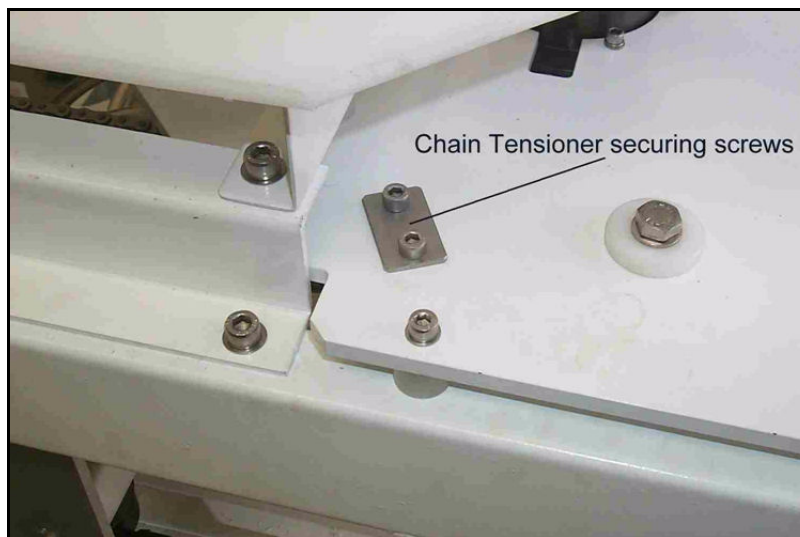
Primary Drive Chain Tensioner Securing Screws
